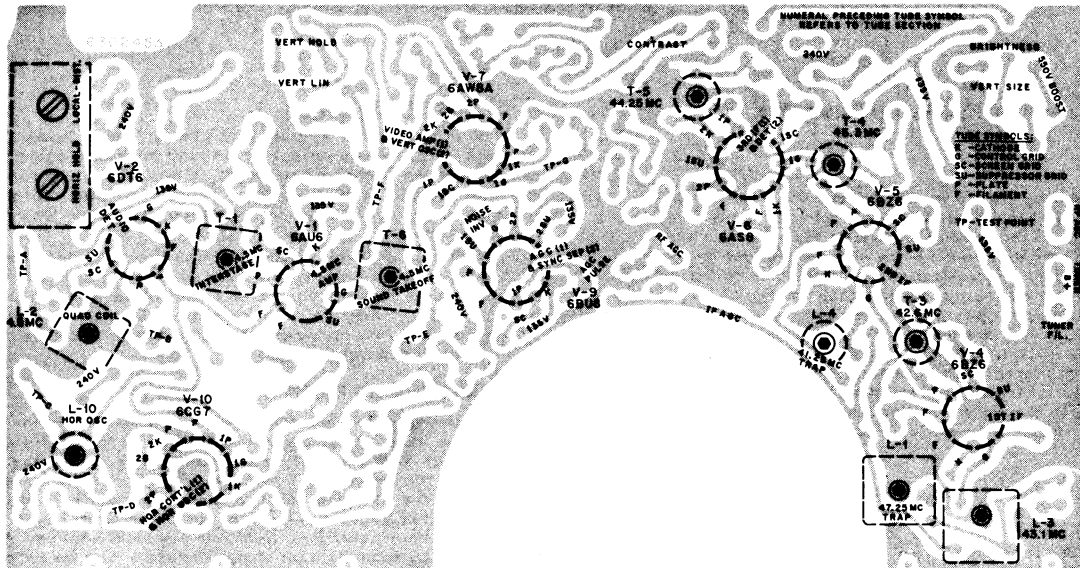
ETCHED PRINTED CIRCUIT BOARD, BOTTOM VIEW
